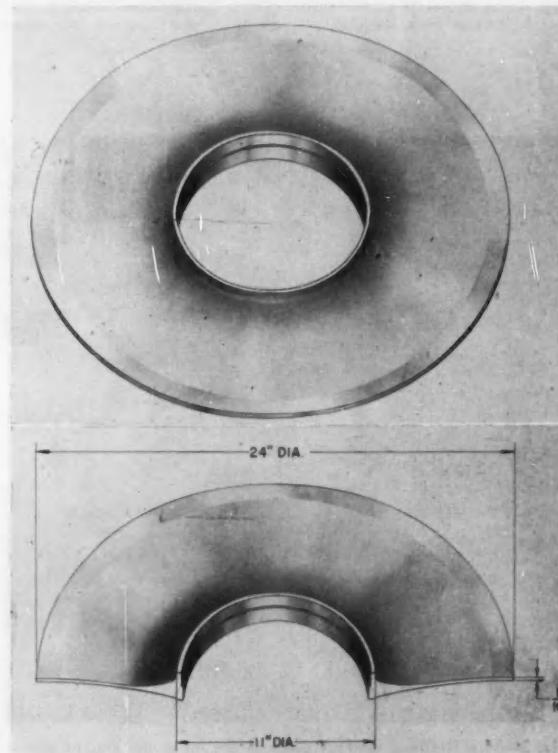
This jet-engine compressor rotor wheel posed many unique problems when first released for manufacture
